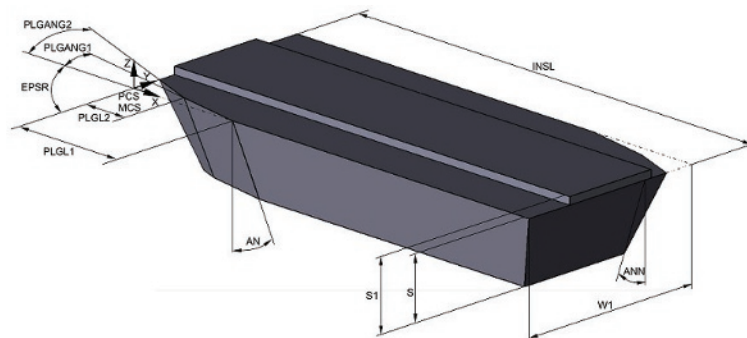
Detailed geometry of a reaming insert with two cutting edges and double plug chamfer
